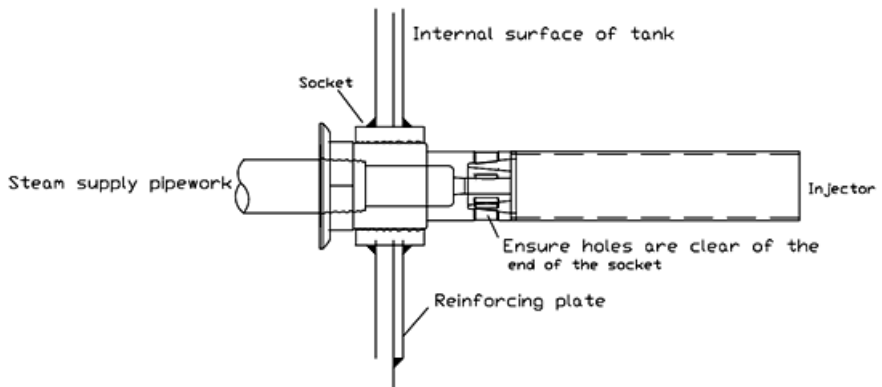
FMINJ25 injector - Typical installation through tank wall
